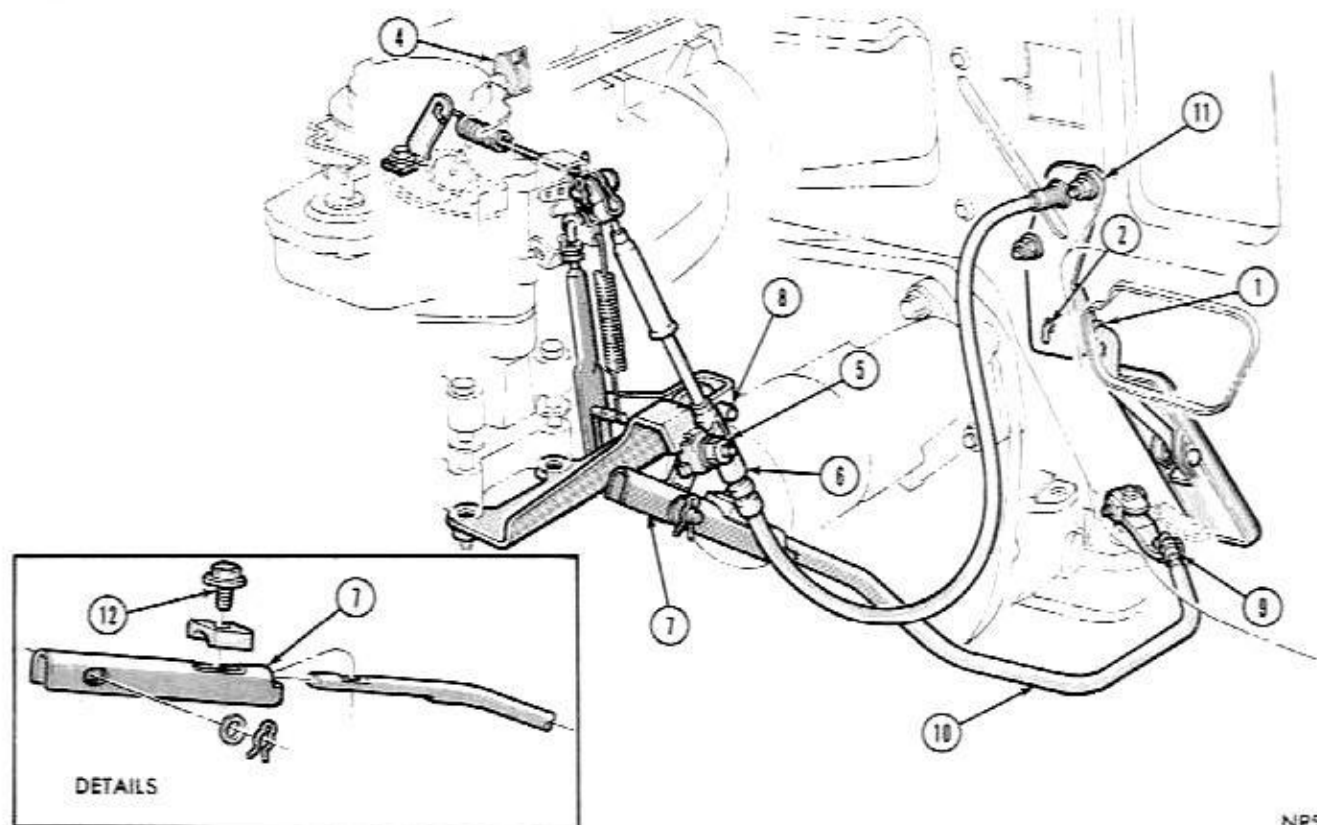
Throttle Rod Adjustment (6 Cylinder Models)
